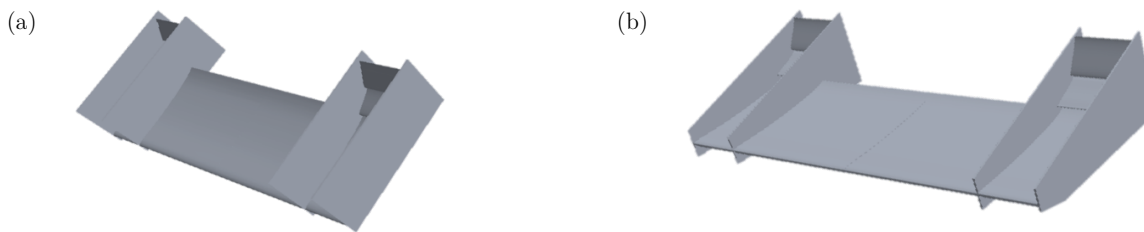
(a) Front wing with rectangular endplates. (b) Front wing with tapered endplates.
